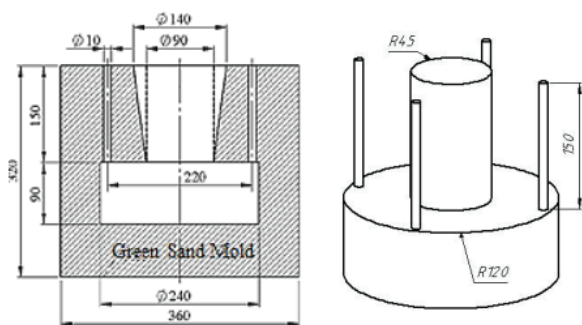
Casting-mold cross-section and 3-D Cad drawing
